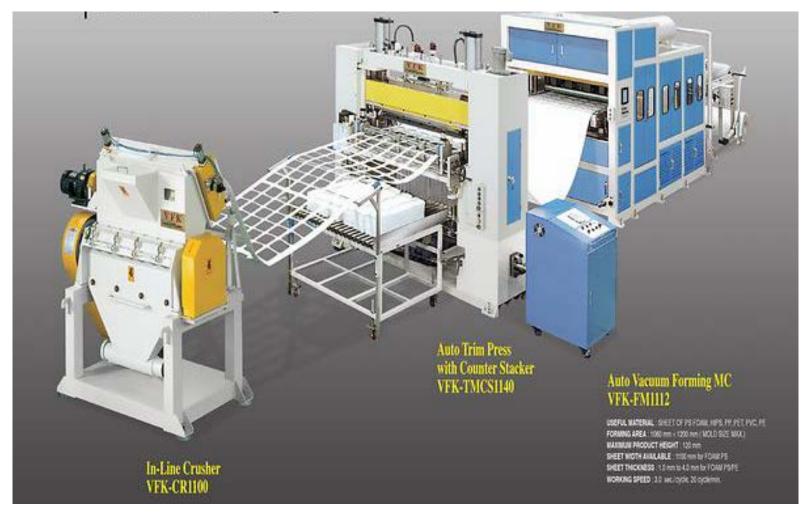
VFK Corporation Auto Vacuum Forming Machine with in line crusher (Source: VFK Corp.)
